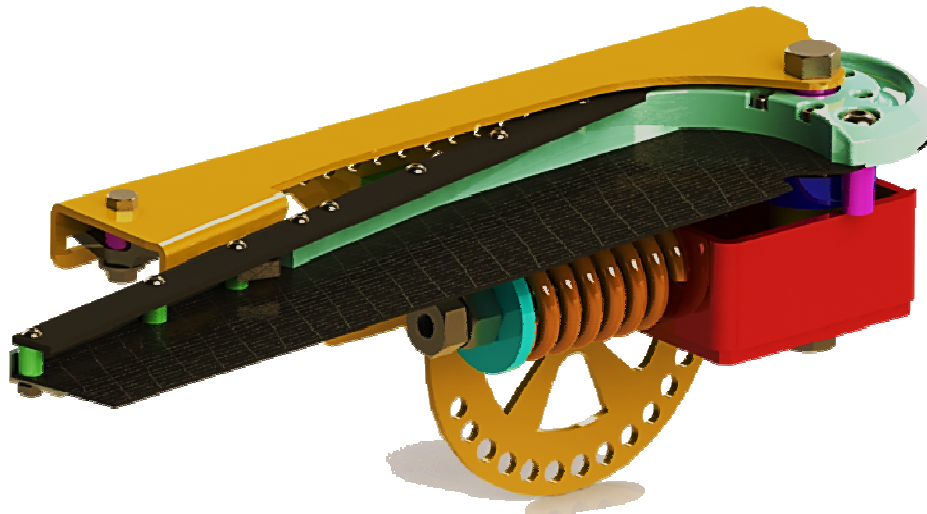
LAUNCHING ASSEMBLY (COCKED)
